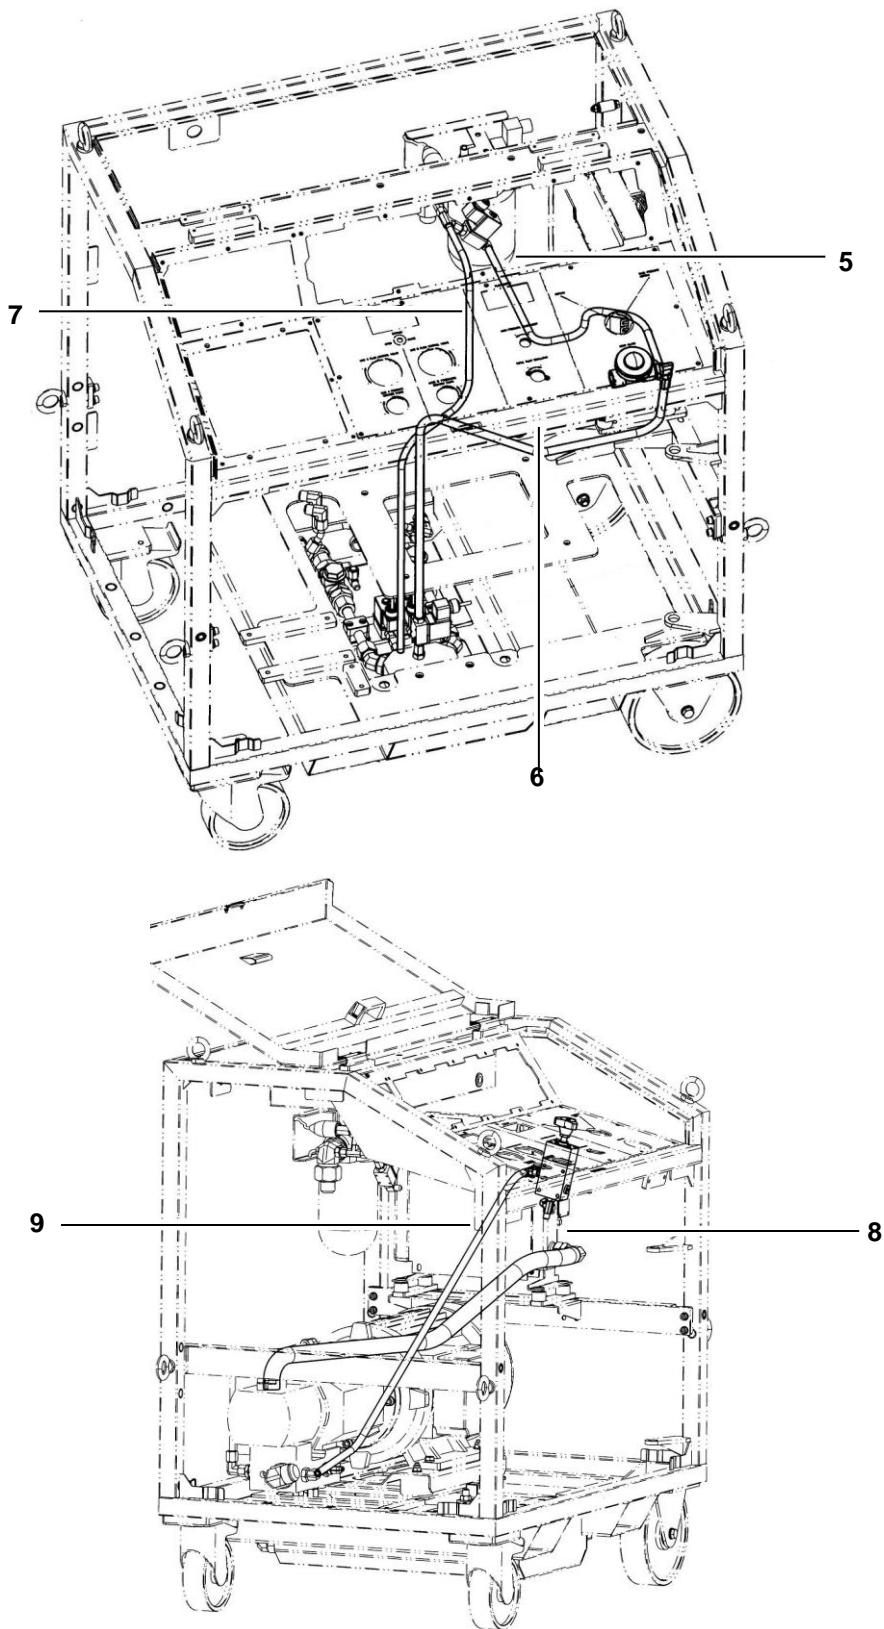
HOSES ASSY (Table 2 of 3)
